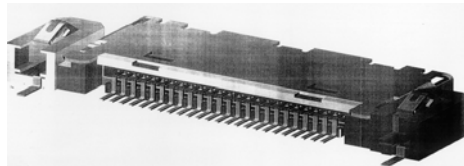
Specifications of Locking Part for I/O Connection Socket
